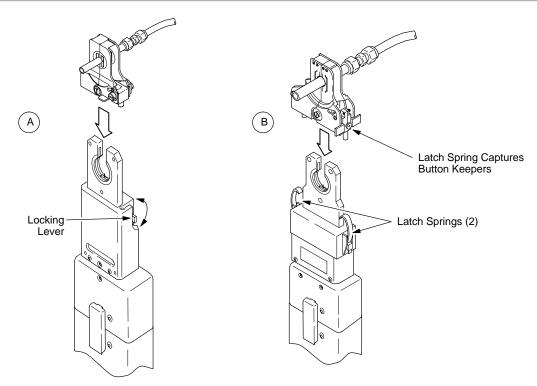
Placing the Fixture on the Micro Weld Head
